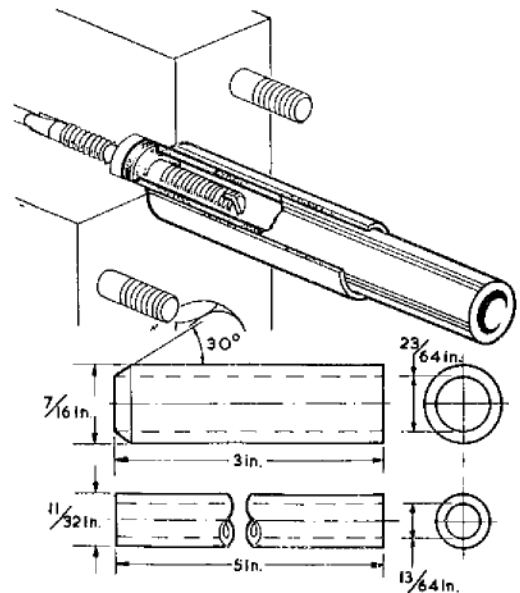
Tool for inserting S.R. adjusting-screw seal
